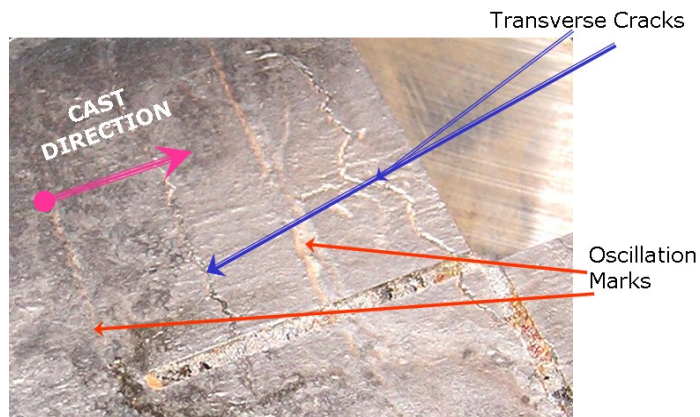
An example of transverse cracks formed during solidification of continuous casting steel process.
